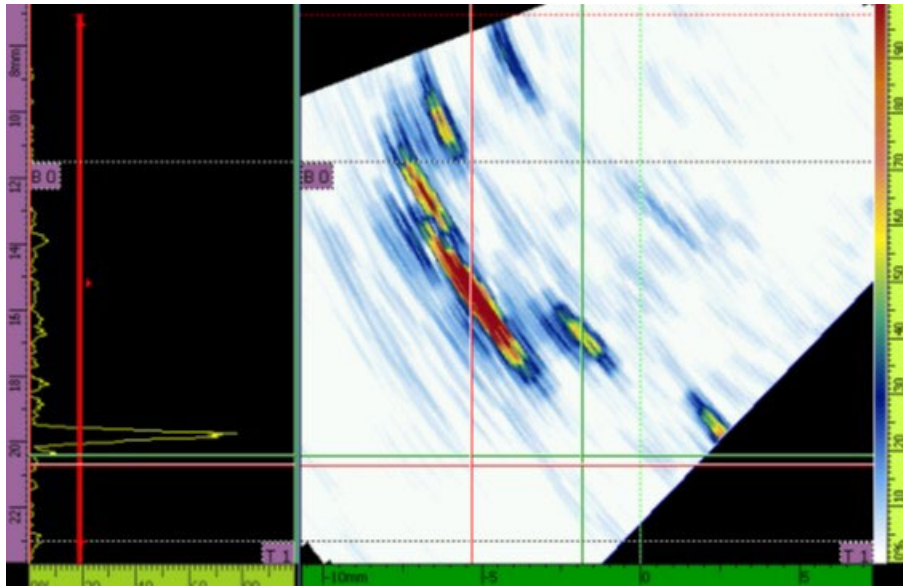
Height measurement of the Flaw B in TTCI P2 fillet weld test panel
